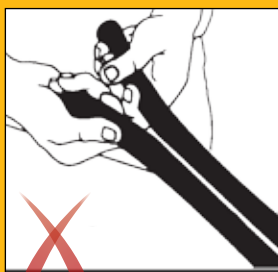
Extreme care must be taken to avoid cutting through the cover of the hoses and thereby exposing the hose reinforcement. If this occurs, the hose assembly must be discarded.
